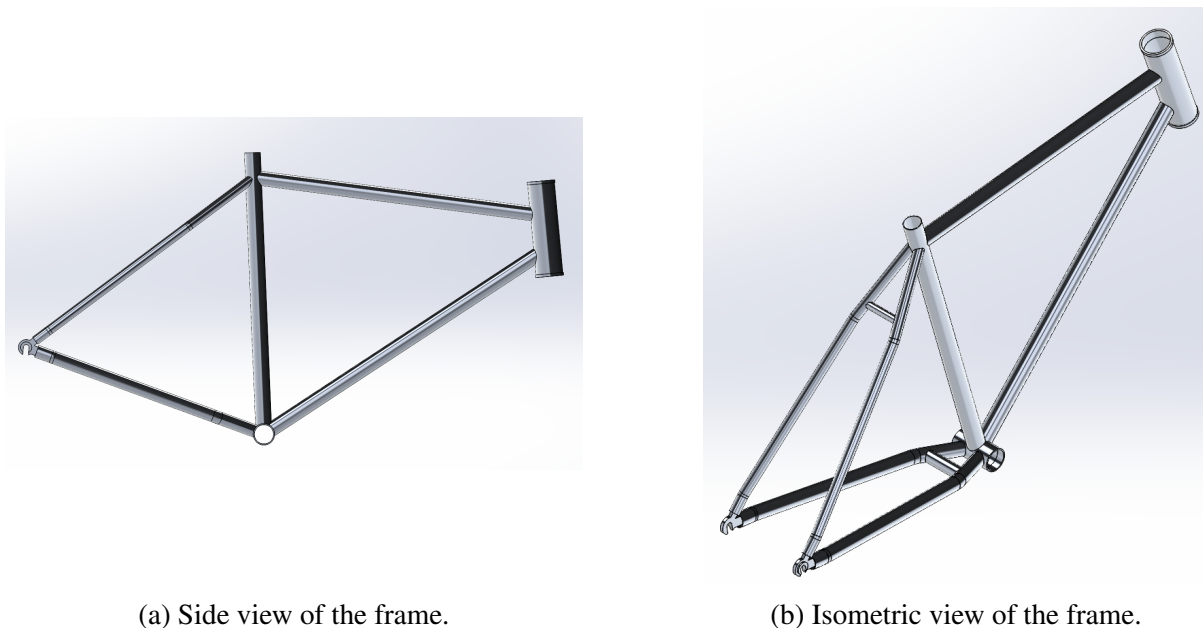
CAD engineering views of the proposed hardtail mountain-bike frame.
